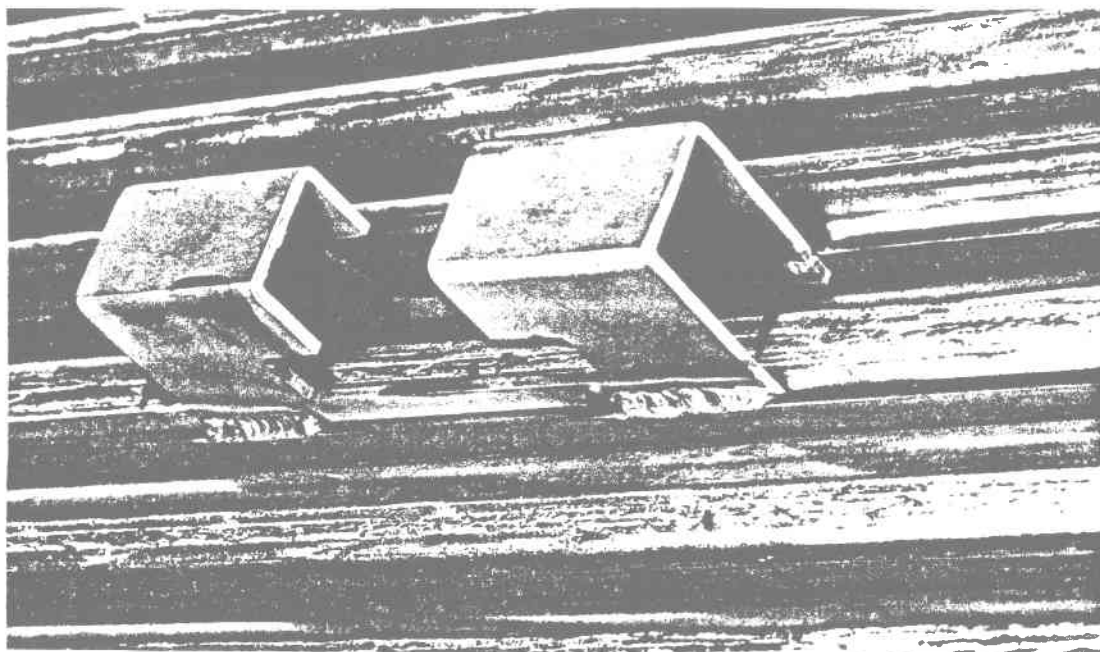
Close-Up of Prototypical Support Lugs Welded to Spacer Strip
